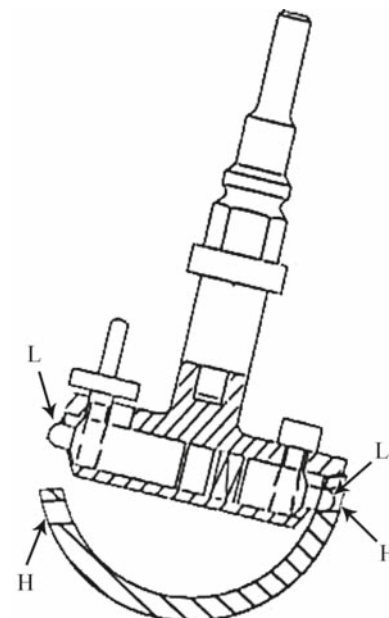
Drawing of introducer and acetabular cup. If the holes in the cup (H) are too close to the cup face, then impact load will be transferred through the locking pins (L) to the cup hole edge, and a burr can be raised.
